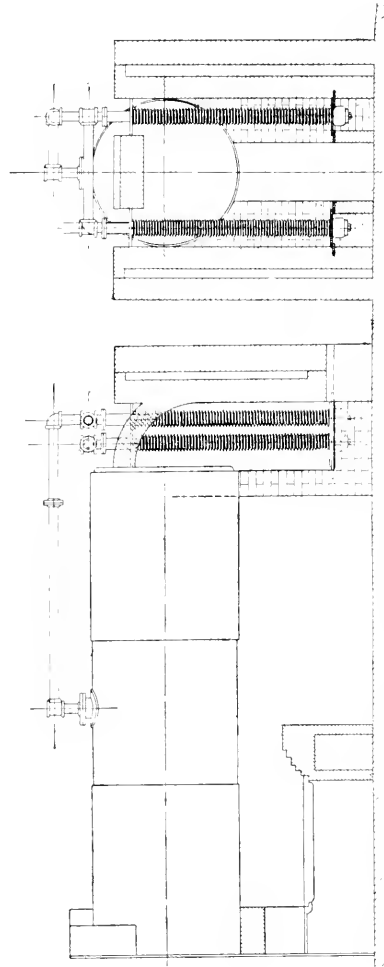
FOSTER SUPERHEATER COMBINED WITH HORIZONTAL RETURN TUBULAR BOILER.
